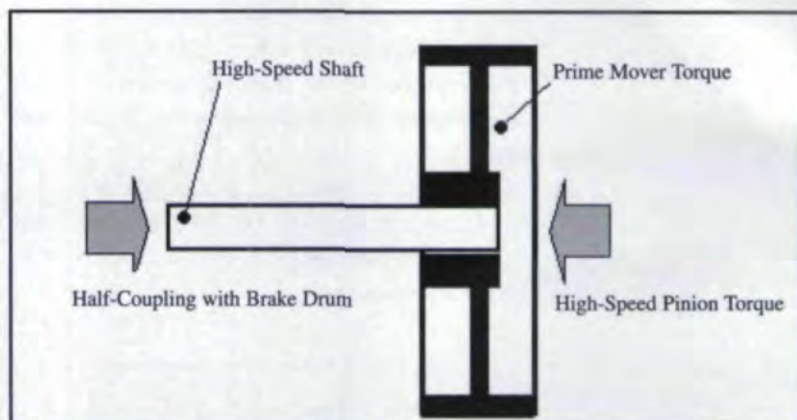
Elastoinertial system comprised of a high-speed shaft and half-coupling.
